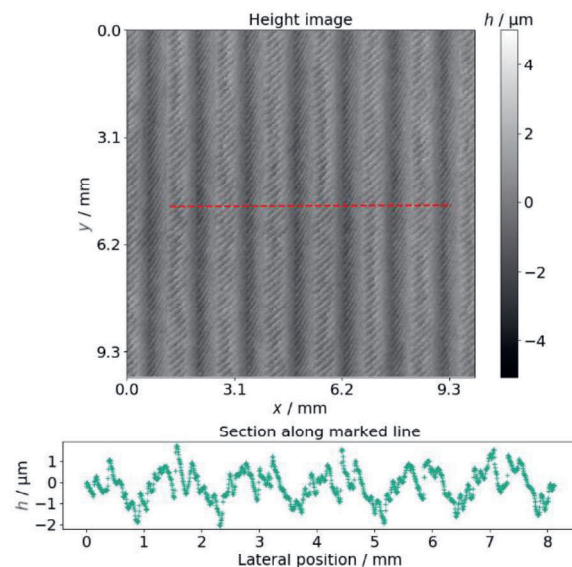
Milling surface machined with an end mill under 5.5 mm axial infeed parallel milling.
